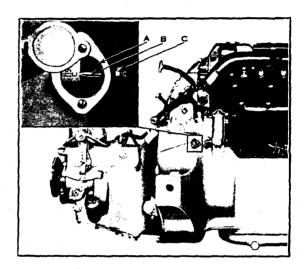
Inspection Hole and Pointer for Second Type Flywheel Timing Marks
